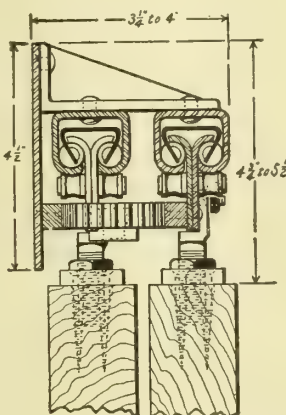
CROSS-SECTION 728-1 ELEVATOR DOOR HANGER
